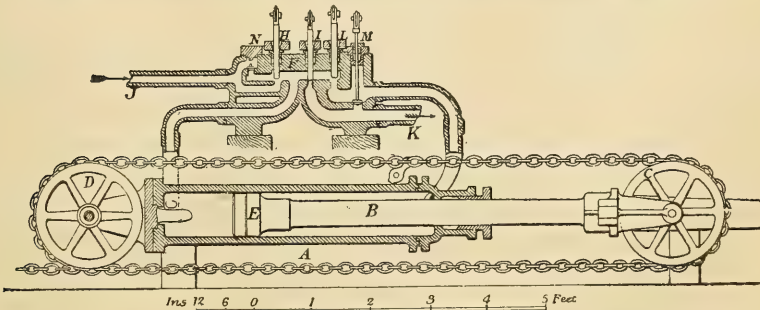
Cylinder and Valves for Double-power Hydraulic Crane.
